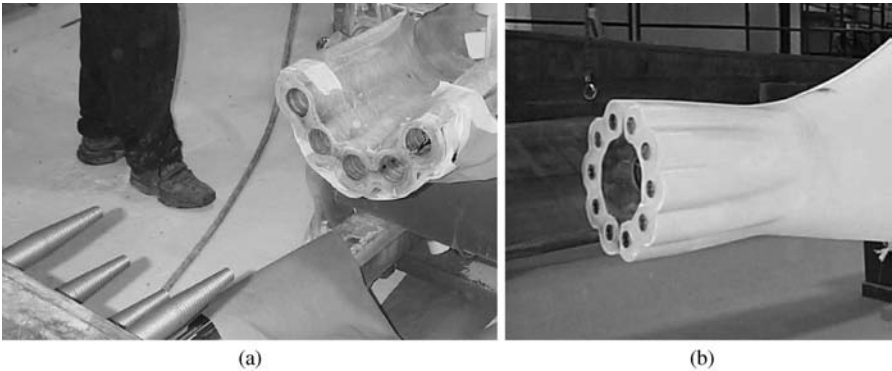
(a) Threaded inserts being installed; (b) bladed root with threaded inserts. Reproduced by permission of TPI, Inc.
